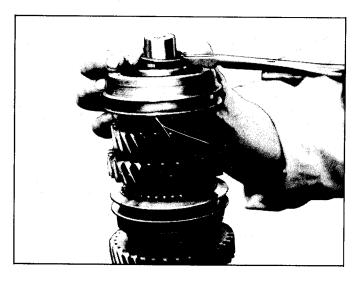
B-9K--Removing 3-4 Clutch Assembly Retainer
